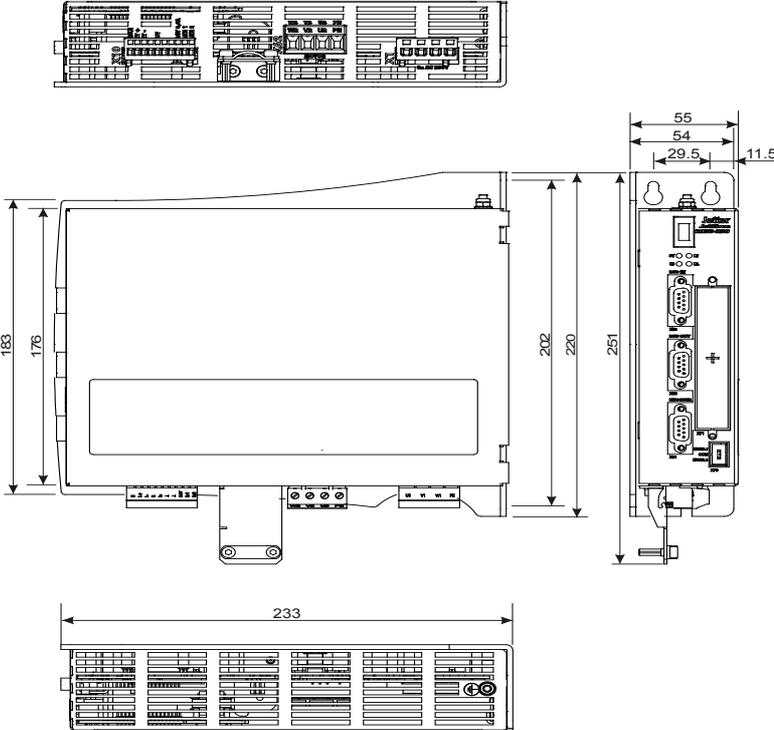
Physical dimensions of the JetMove 203B-230 (in mm)
